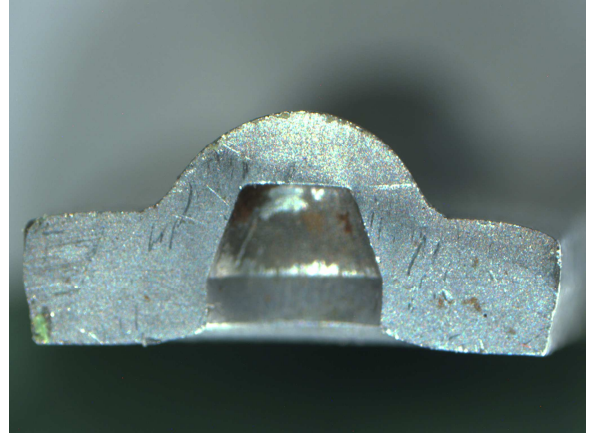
cross-section through non-welded tab (sample “A” in Figure 3).
